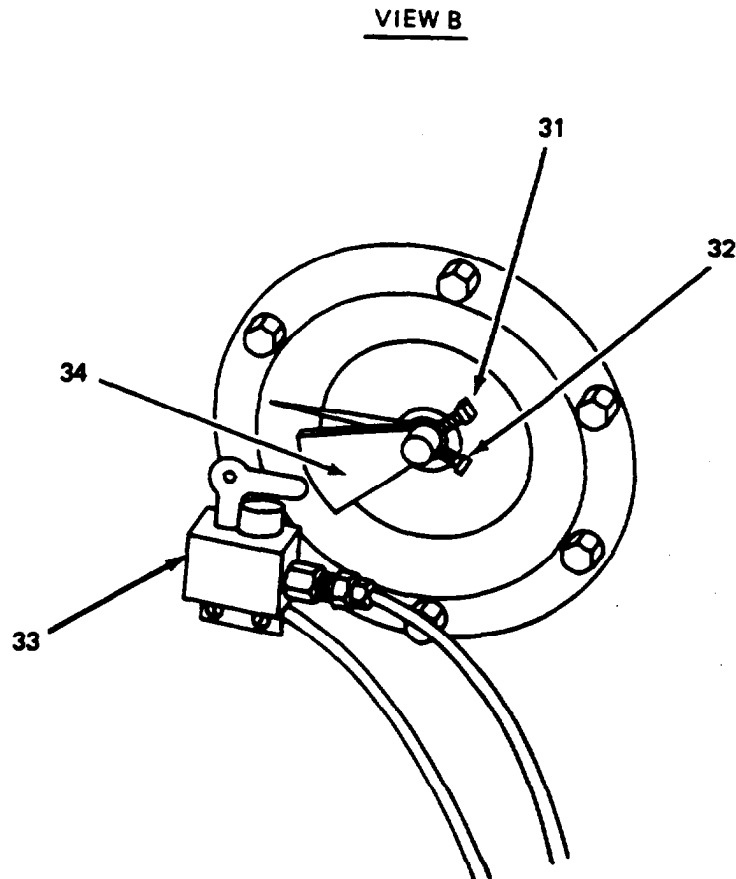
Disassemble/Assemble Asphalt Tank Gage (Sheet 1 of 2).
